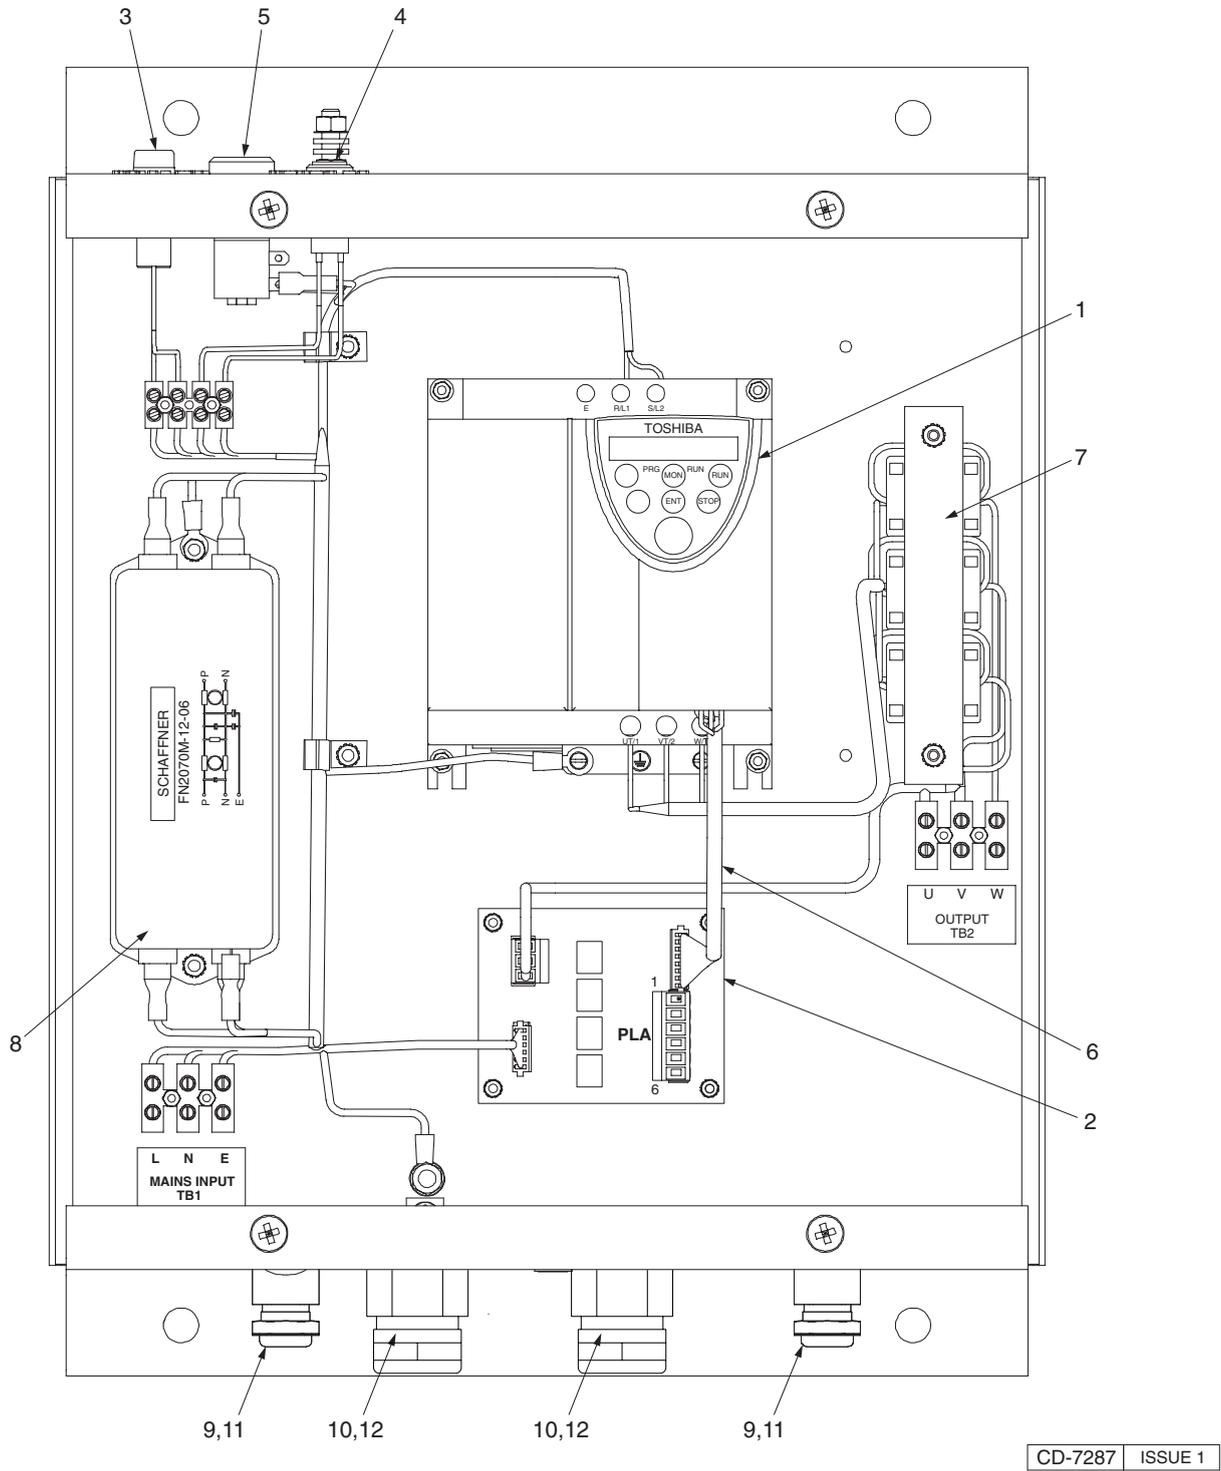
Drive Control Unit (GTX-A24): Main Assemblies
